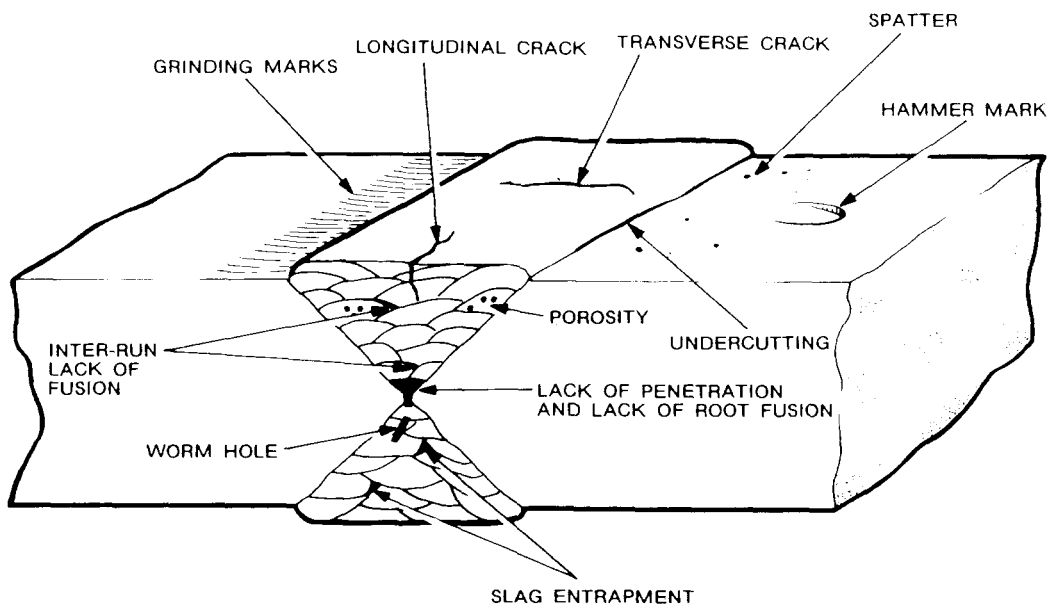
TYPICAL WELDING DEFECTS
